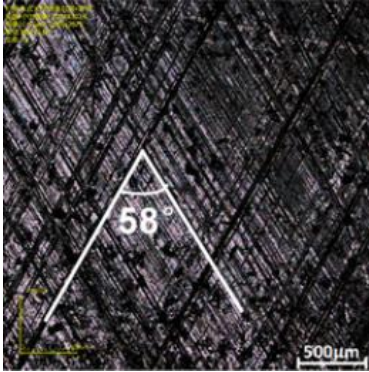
Morphology of Scuffing Damage in Heavy-Duty Cylinder Liners Caused by Lubrication Failure [3]
